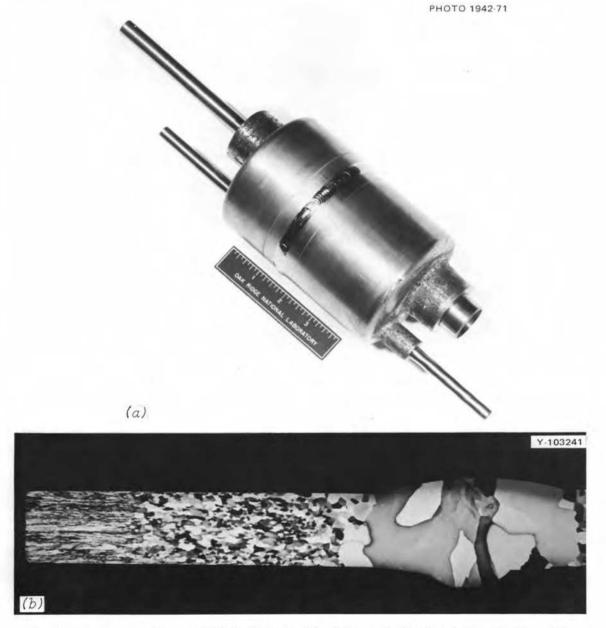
Manual gas tungsten-arc weld joining back-extruded molybdenum half sections. (a) Completed pot. (b) Cross section through the weld; etchant: 20 vol % $H_2O_2 - 10$ vol % H_2SO_4 (96% H_2SO_4) -70 vol % H_2O ; 6×.
